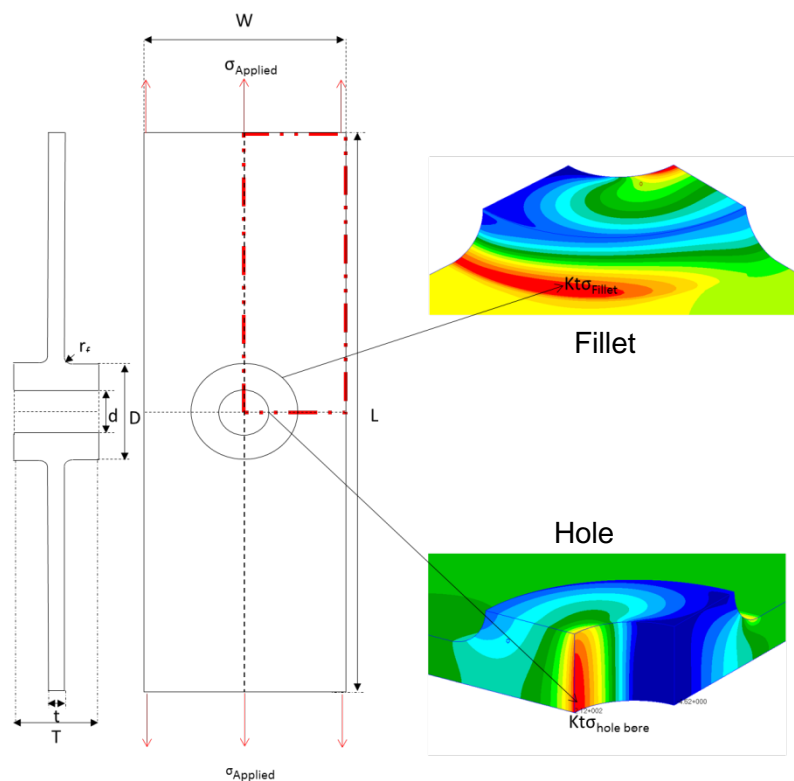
Example specimen geometry (left), typical fringe plots at fillet and hole bore (right)
